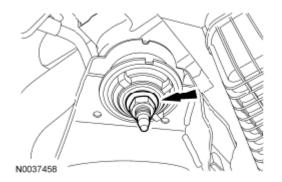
Locating Front Subframe Nut Courtesy of FORD MOTOR CO.
